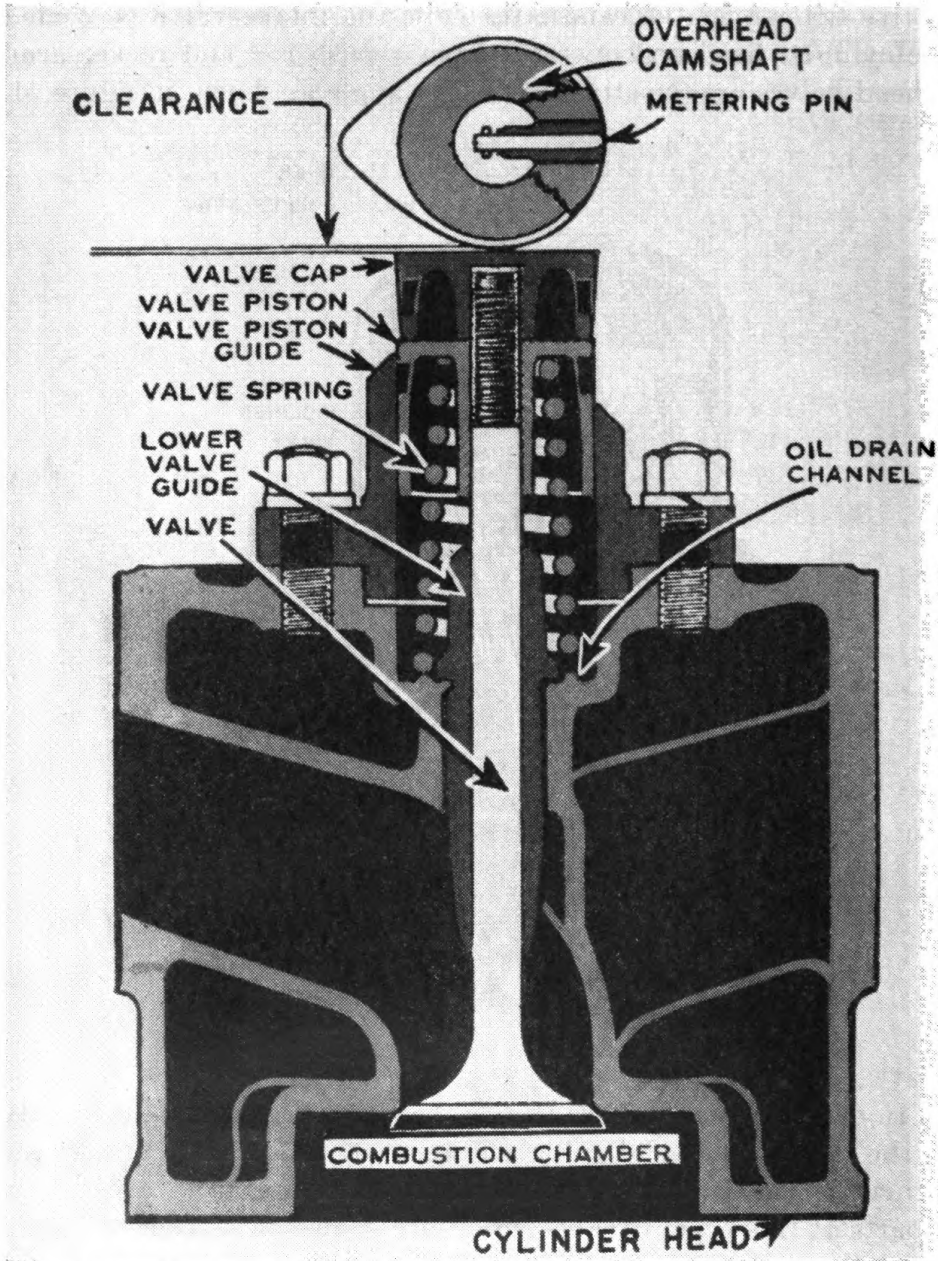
Section through valve mechanism of overhead-camshaft engine.
